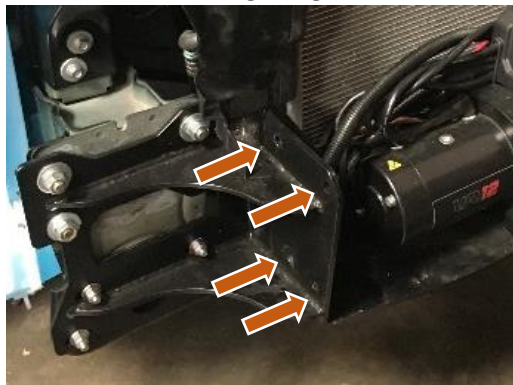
Aluminum Bumper to Winch Tray Mounting Locations
